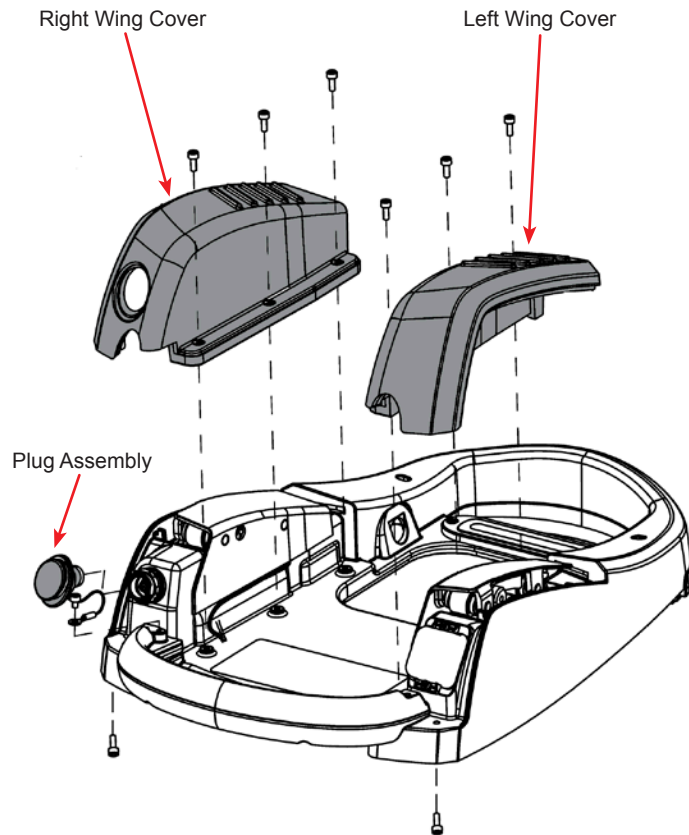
Footswitch Wing Covers and Connector Plug Assembly (shown without footpedal)
